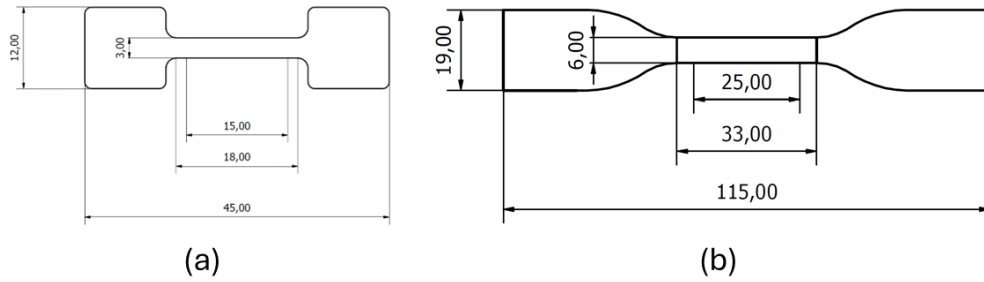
No complexity specimens' dimensions: (a) Type 0 specimen has a 6 mm thickness; and (b) Type 1 specimens has a 3 mm thickness.
